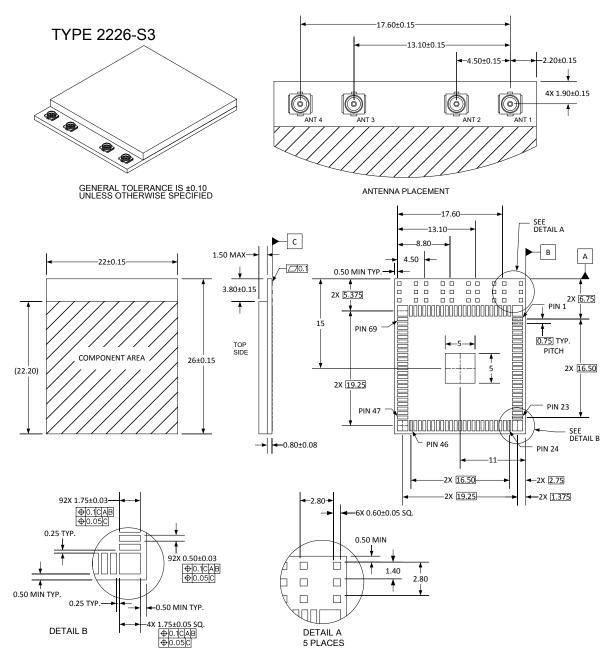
M.2 Type 2226-S3 Mechanical Outline Drawing Example
